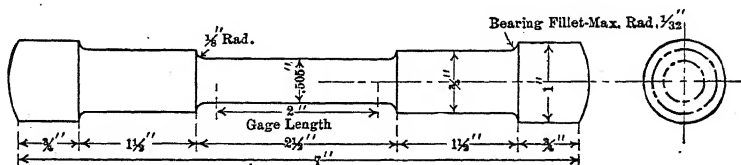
SHOULDERED TEST BAR AFTER MACHINING.
